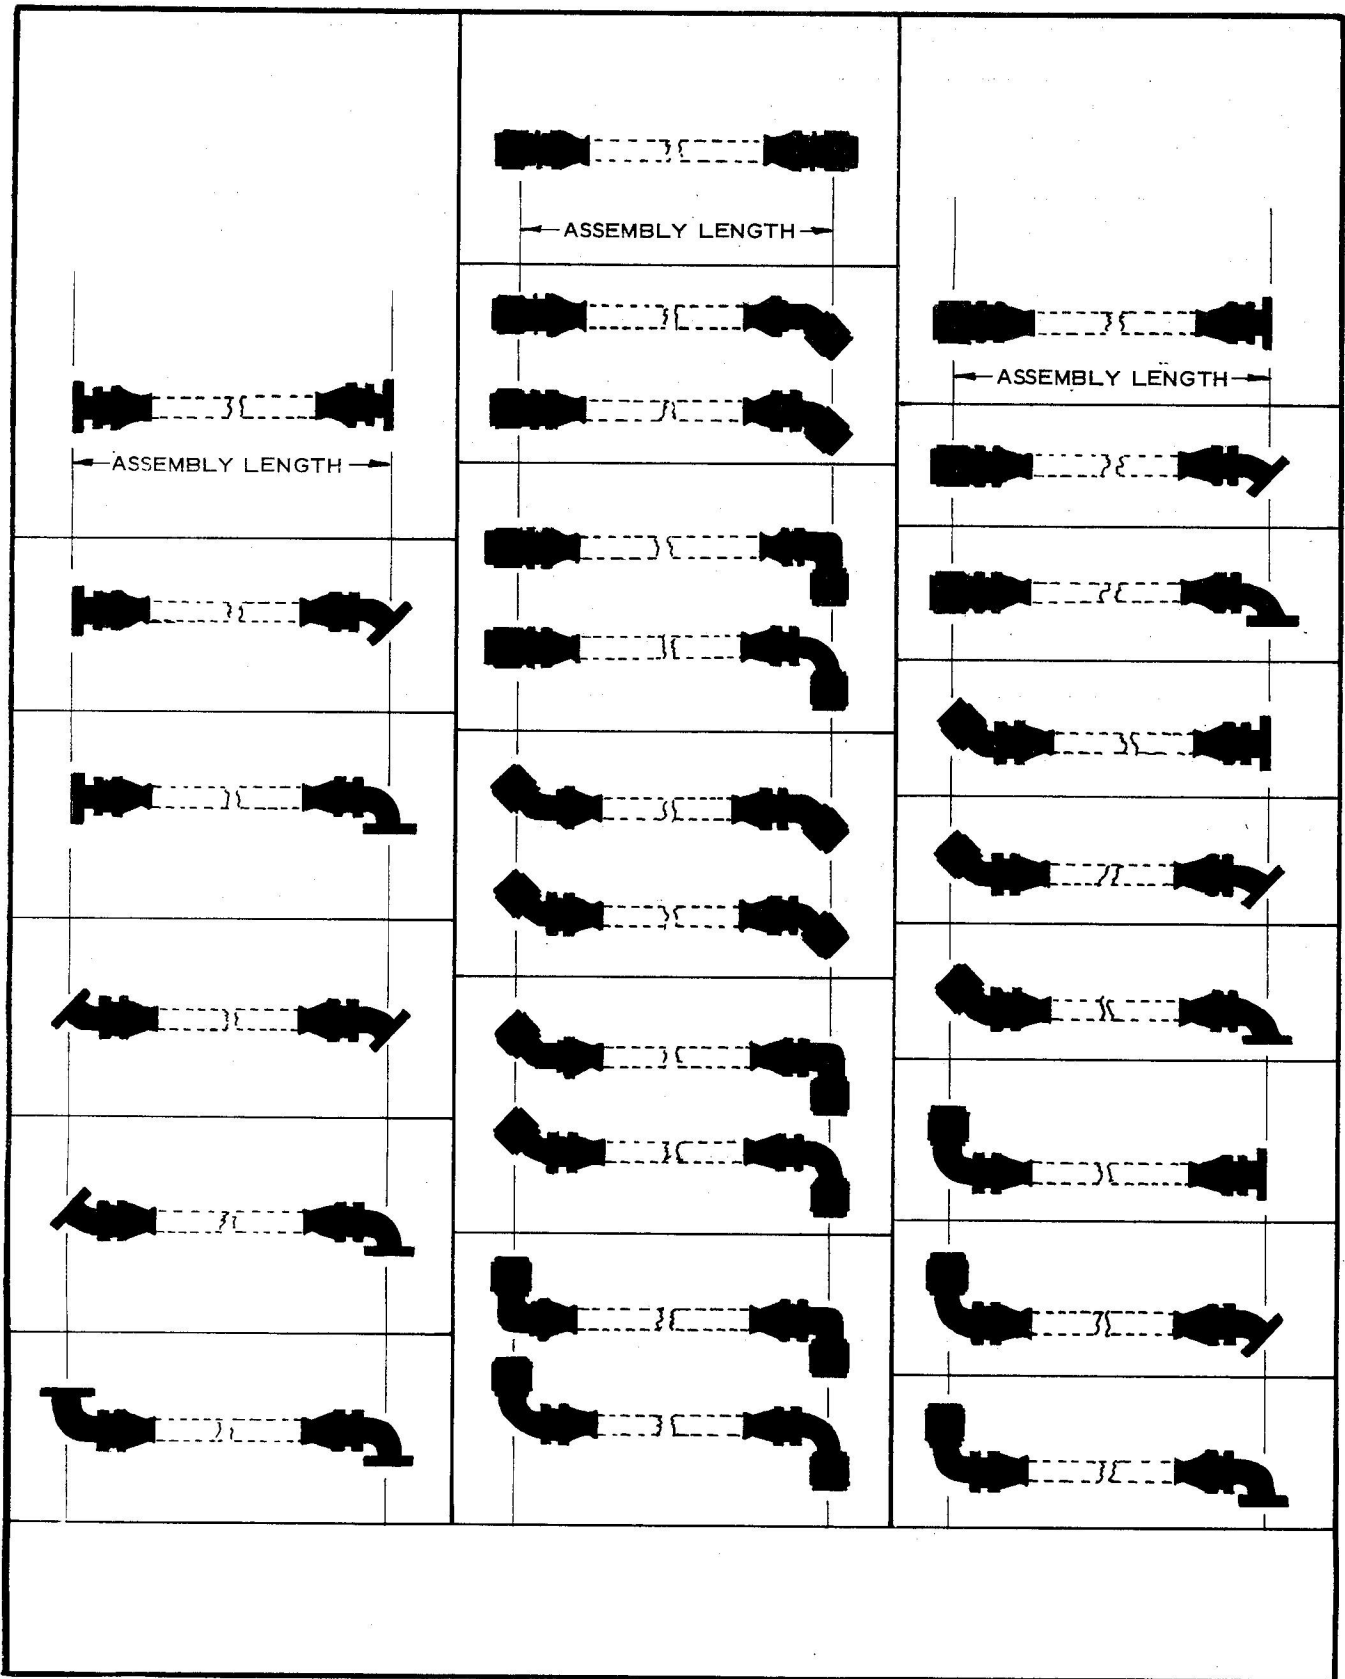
Standard Method For Measuring Hose Assembly Lengths
